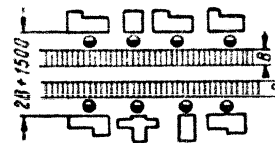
Clearance between Two Rows of Machine Tools for Placement between Them of Two Rollways (Conveyors)
